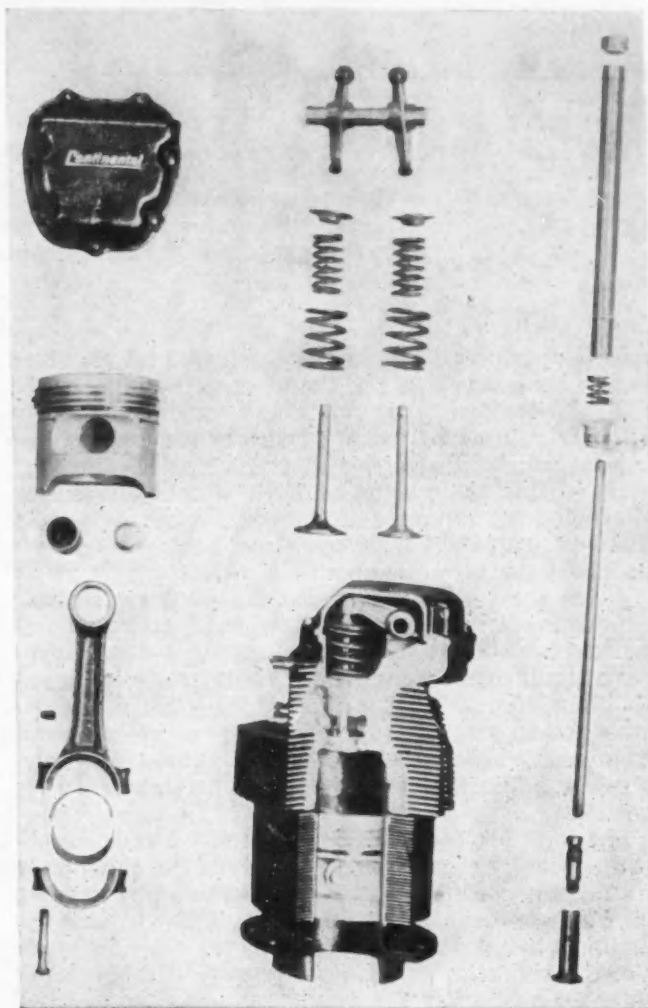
Smaller (67-cu-in. displacement) cylinder and interchangeable parts
